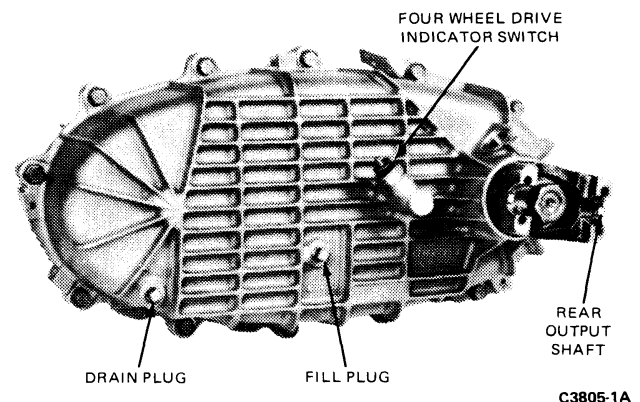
Borg-Warner 1345 Transfer Case—Rear View Cover Half
